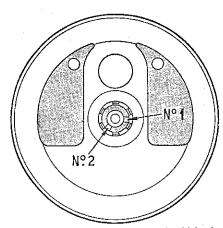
The alternator rotor should be installed using the No. 1 keyway on all models except T20T trials.
